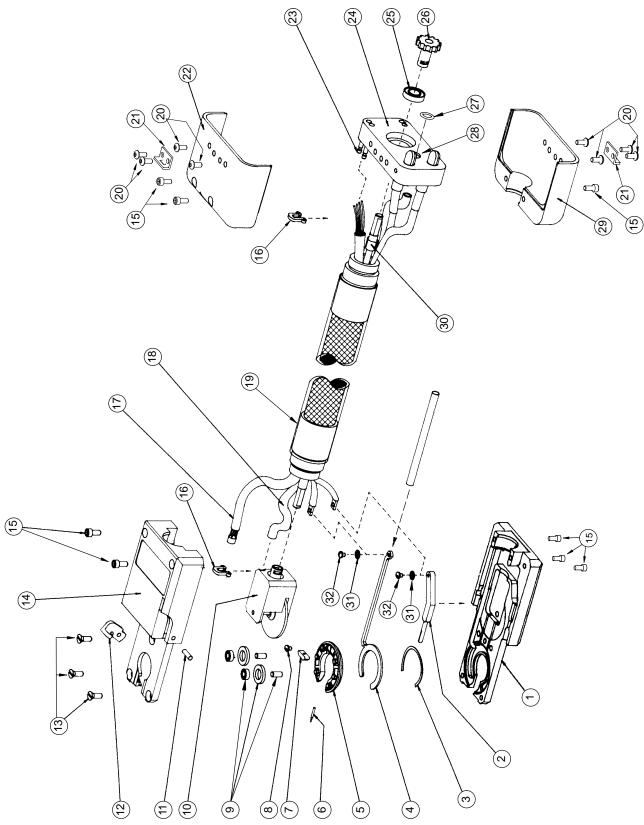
CWS-4MFH-A Flexible Micro Weld Head
